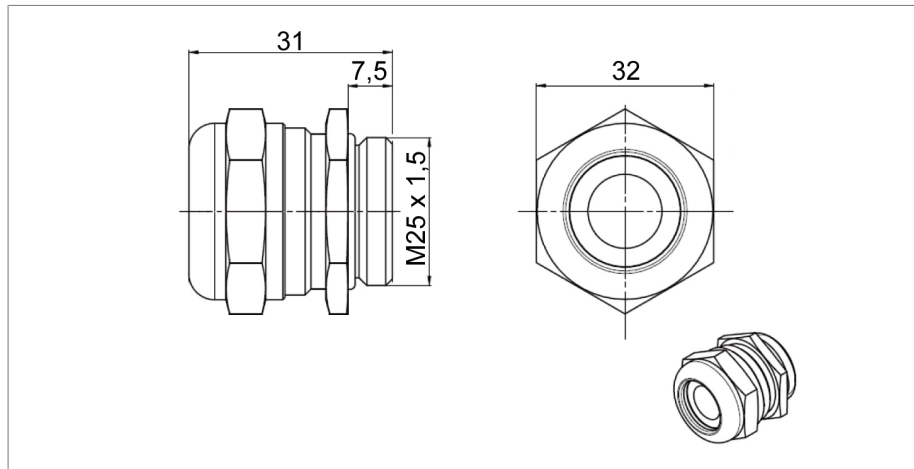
WADI cable screw connection; material: nickel-plated brass; clamping range 13...20 mm
